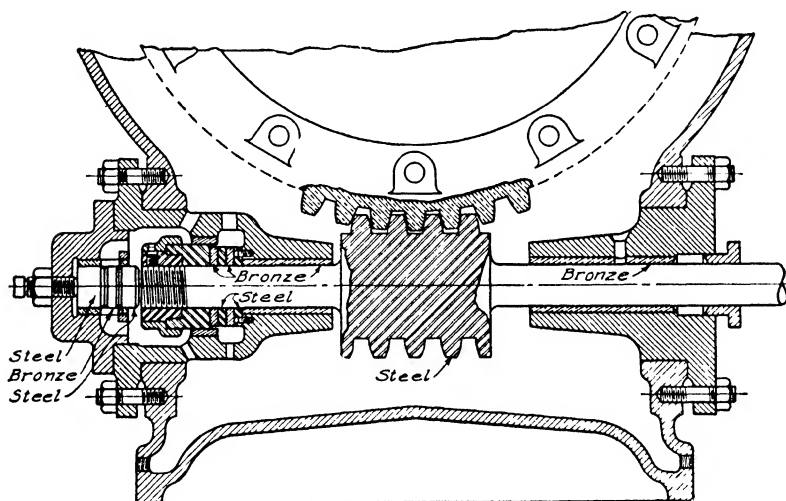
Section through Worm-Gear Housing, Showing End-Thrust Arrangement
